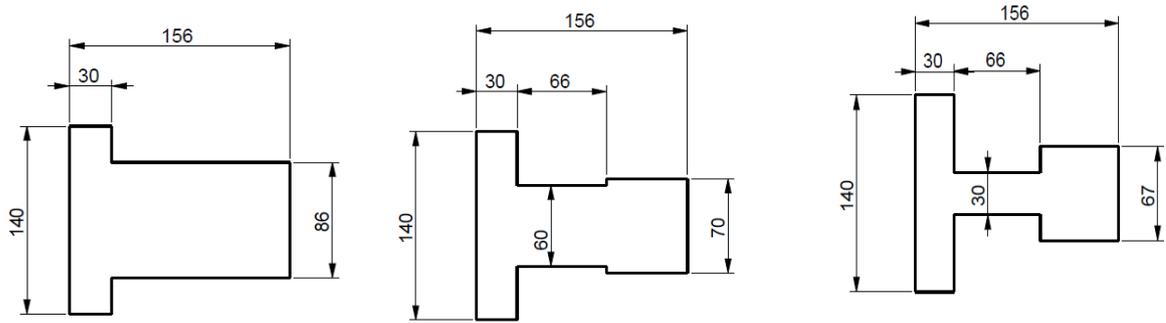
Section at pass-12    Figure 3.14 Section at pass-13    Figure 3.15 Section at pass-14
